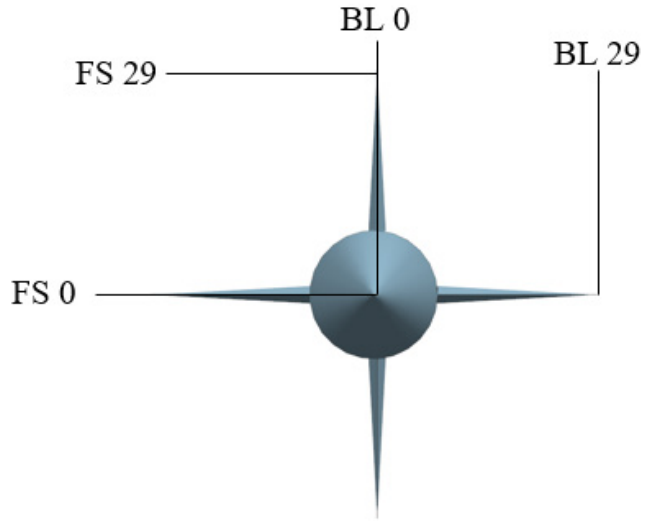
Roadrunner Back View (1:20) (Units in Inches)
